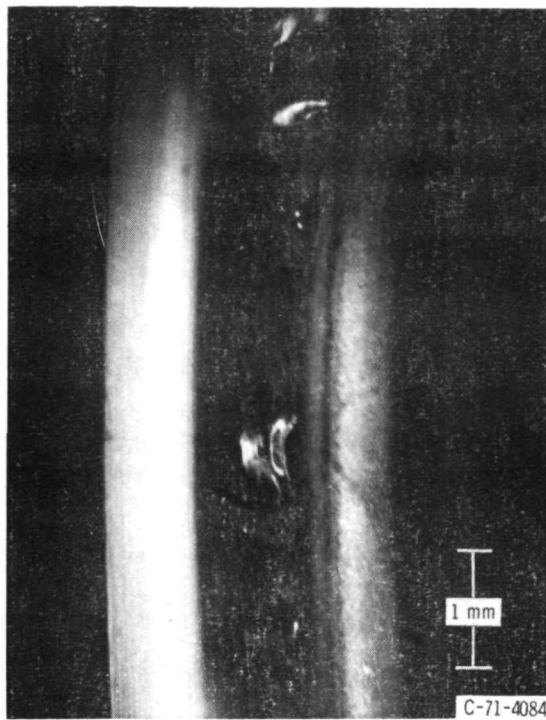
(a). - Blistered lead transfer on inner race of bearing 6.
